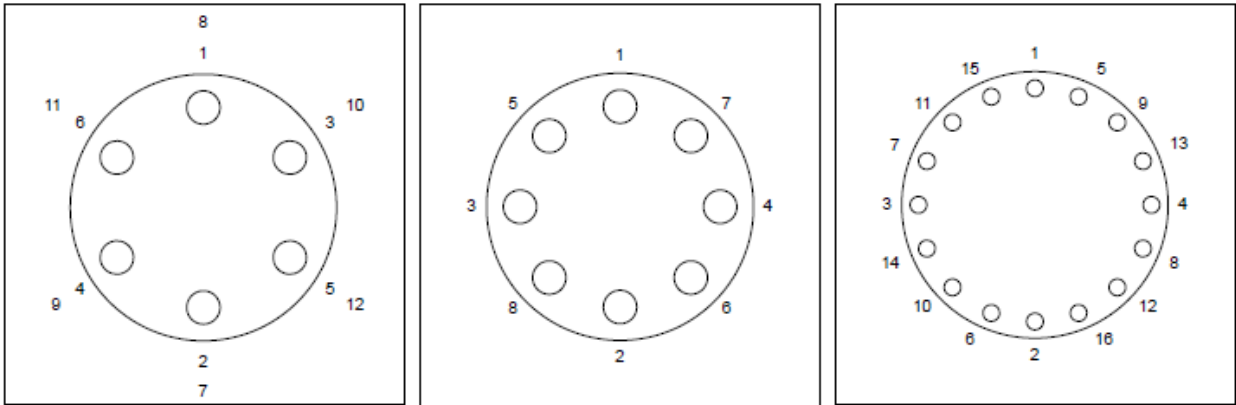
The screw tightening pattern to seal two ConFlat flanges having (a) six, (b) eight and (c) sixteen bolts/screws [8].
